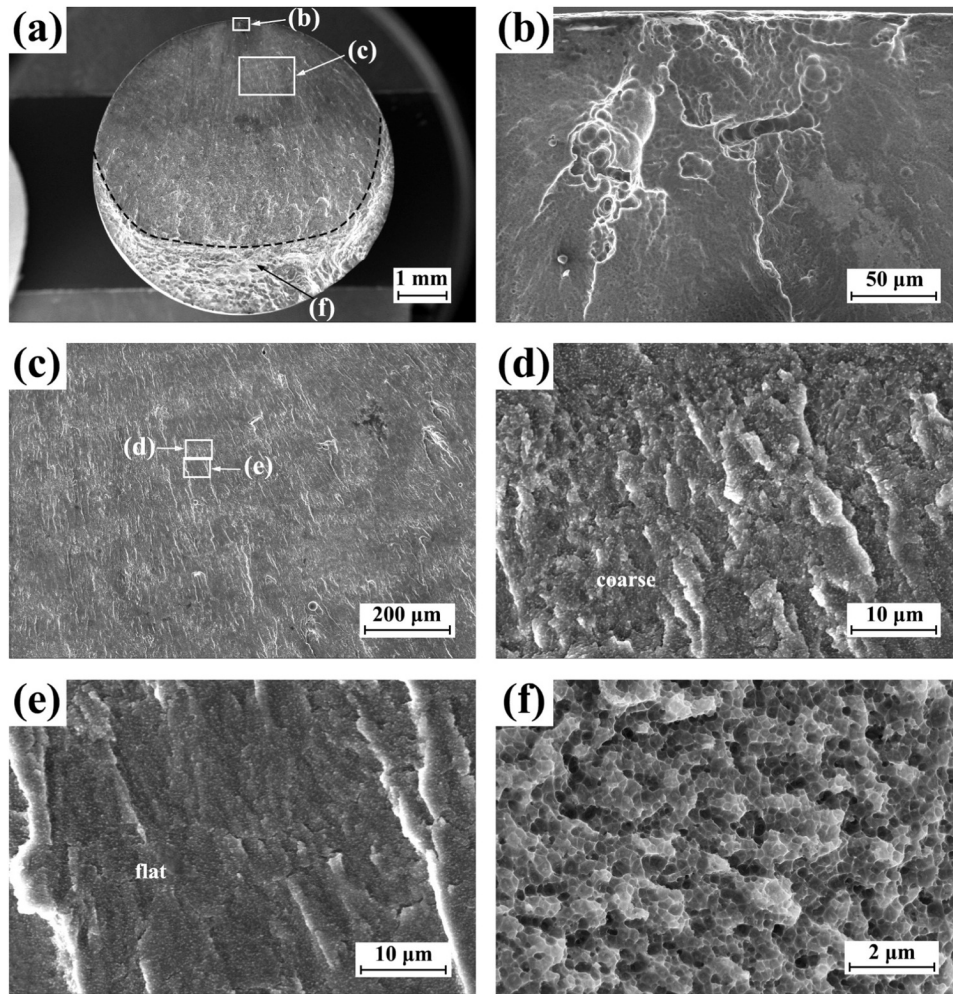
Fracture surfaces of the CF-SLM specimen,  $S_{max} = 80$  MPa,  $N = 2701,133$ . (a) global view, (b) fatigue initiation, (c) crack propagation, (d) coarse facet, (e) fine facet, (f) final fracture.
